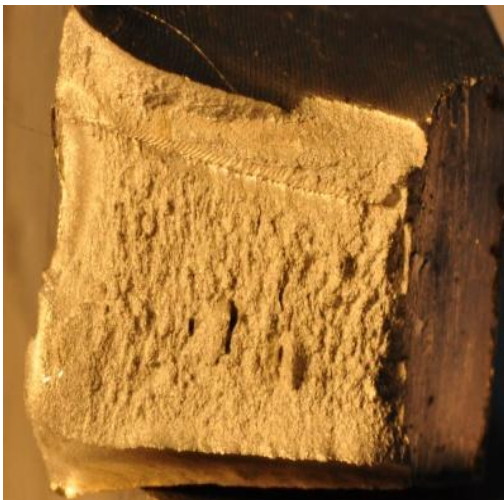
₁. Macrophoto. fracture (700rpm,75mm/min)
